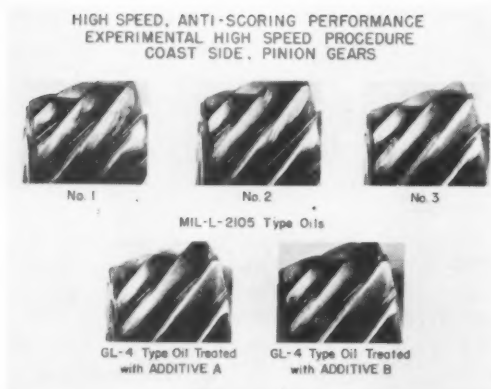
Coast sides of pinion gears illustrate freedom from scoring, and better gear tooth condition with new oils.
